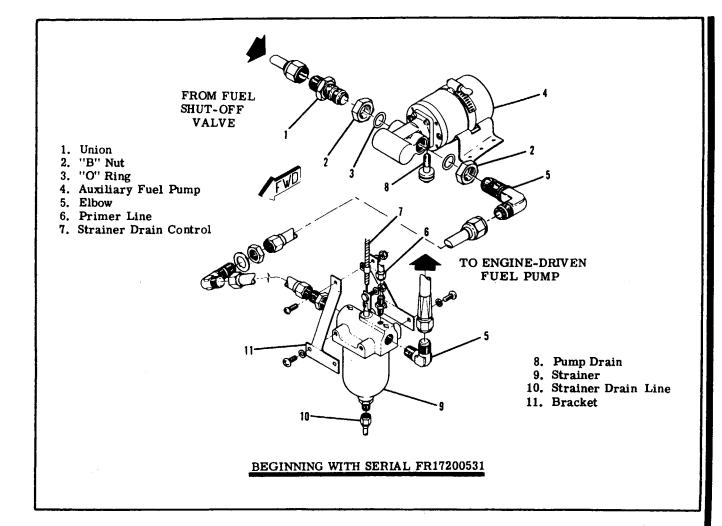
Auxiliary Fuel Pump and Strainer Drain Installation (Sheet 2 of 2)
